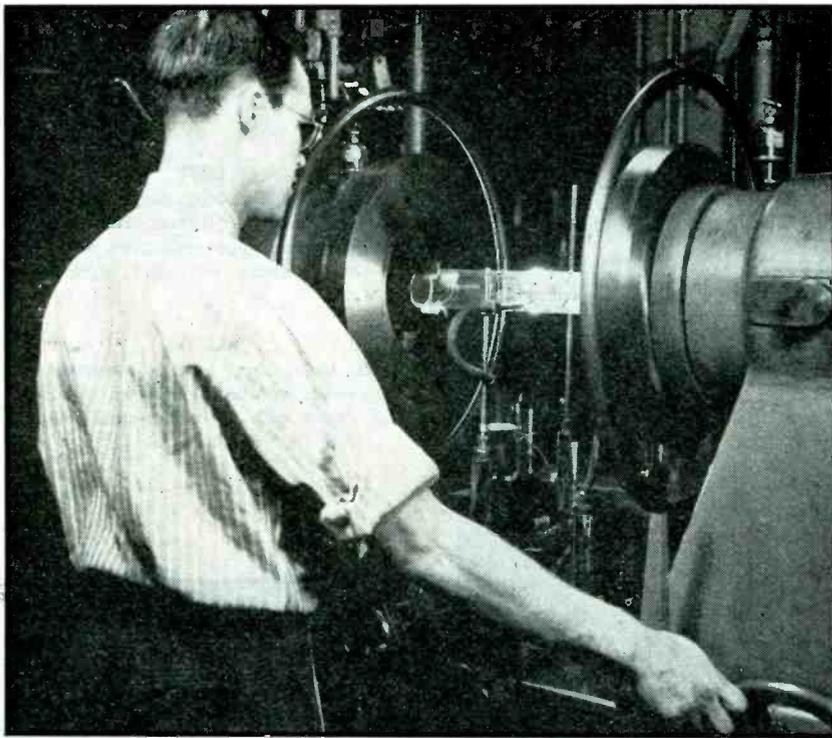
Electronic cross-fire guns mounted on a glass-sealing lathe
